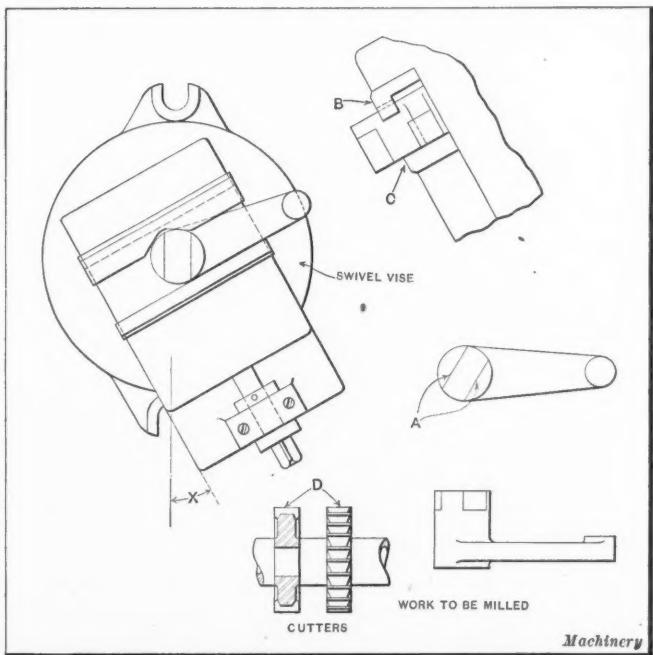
Milling Flats on Lever Boss in Swivel Vise
